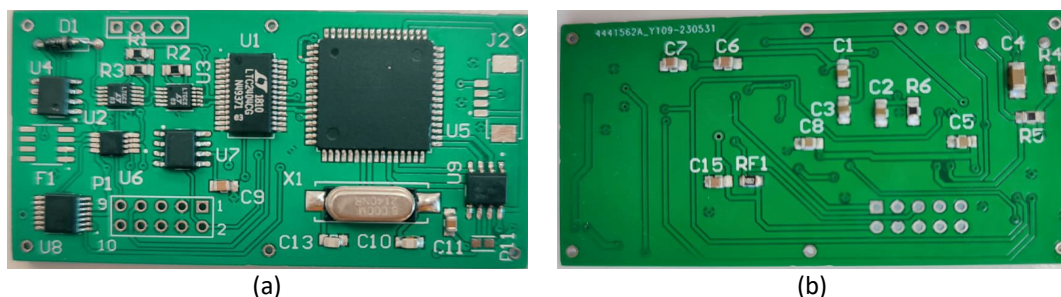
The assembled readout board: (a) Front side and (b) Back side
